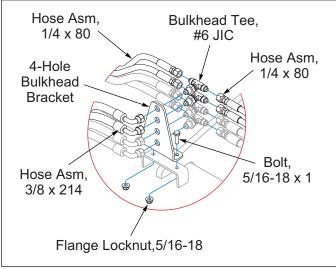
4-Hole Bulkhead Bracket Detail
